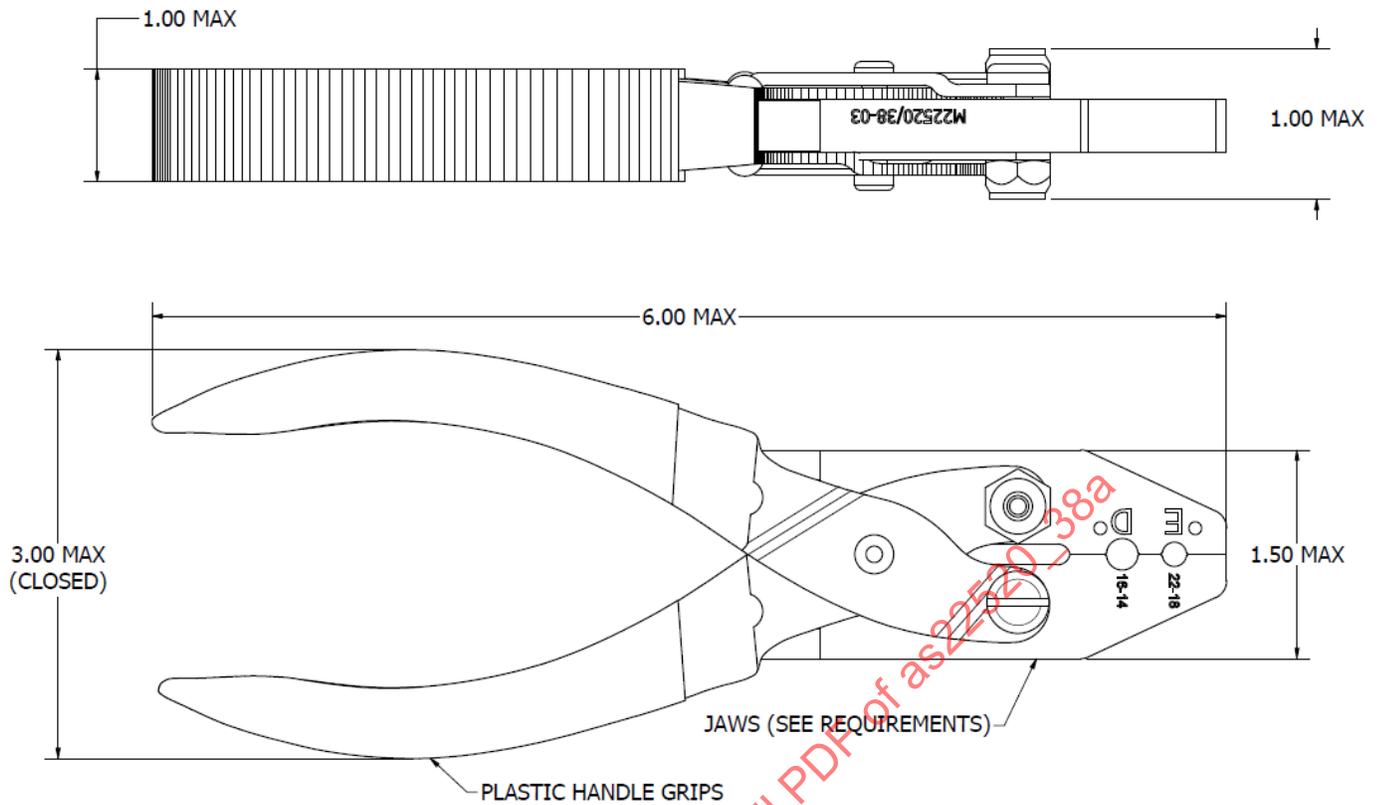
M22520/38-03 WIRE INSULATION GRIP CRIMPING TOOL
